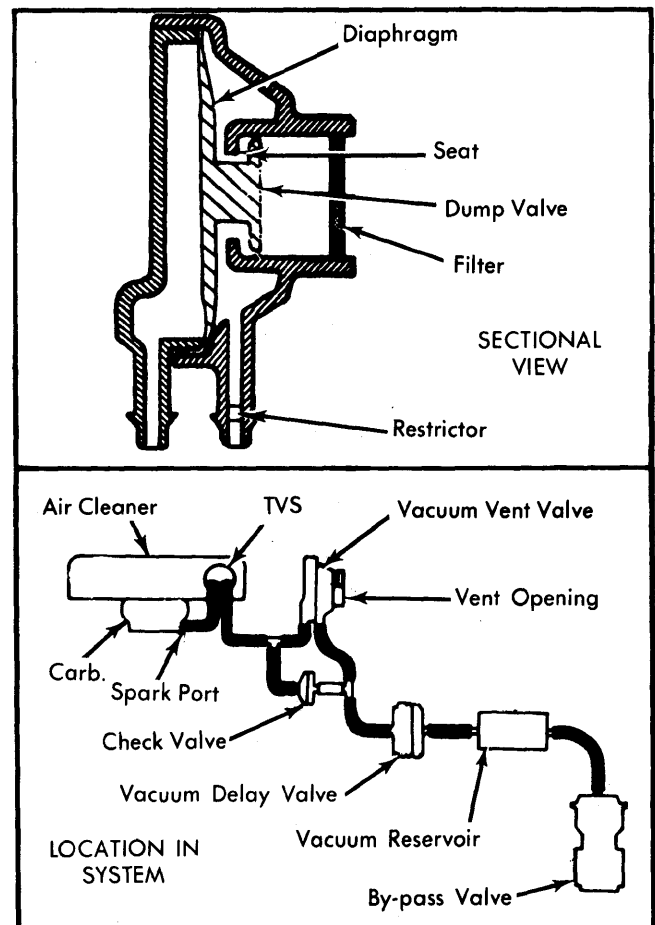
Illustrating Placement and Construction of Vacuum Vent Valve
